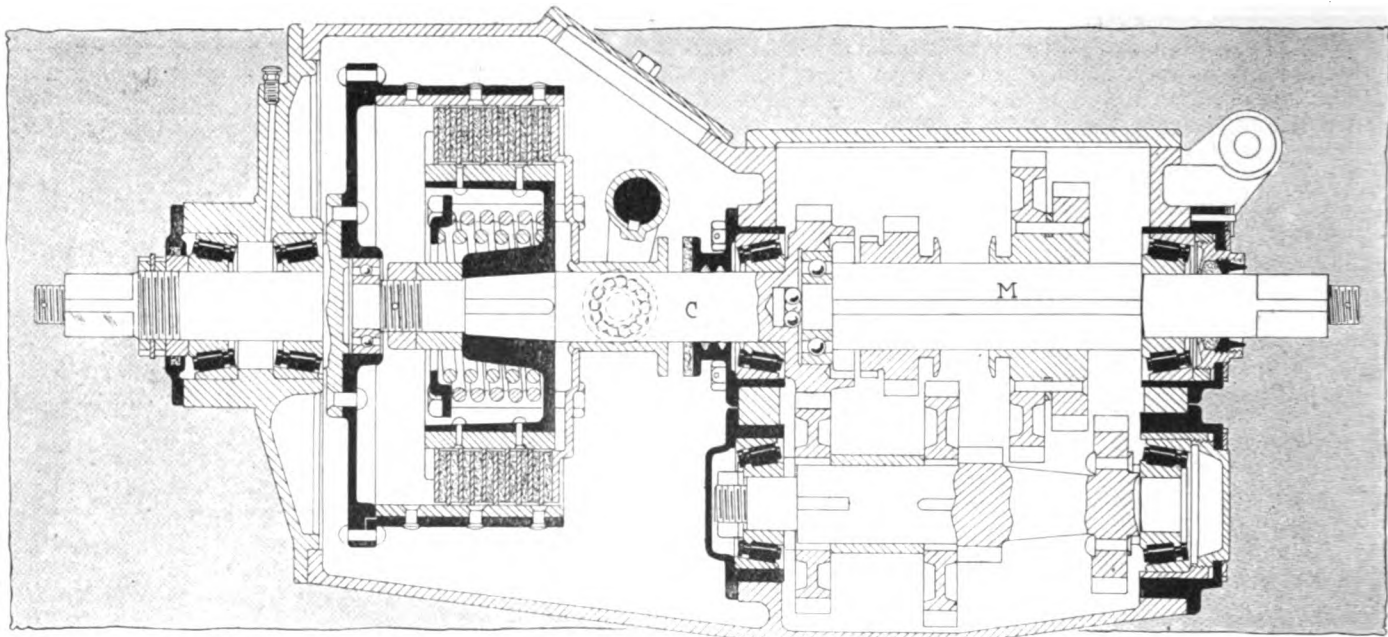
Combined dry-disk clutch and gearset. Note oiltight dividing wall and use of roller bearings
